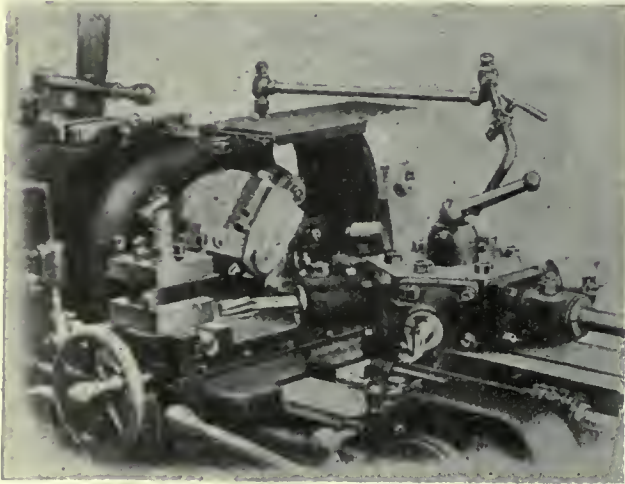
THE SHORT END OF THE CRANKSHAFT MACHINED ON A CAPSTAN LATHE
